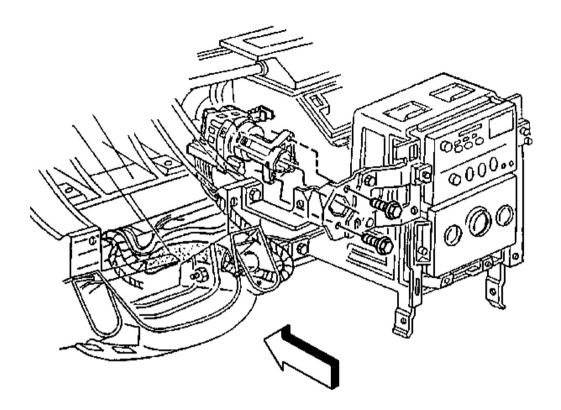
View Of Ignition Switch Courtesy of GENERAL MOTORS CORP.
